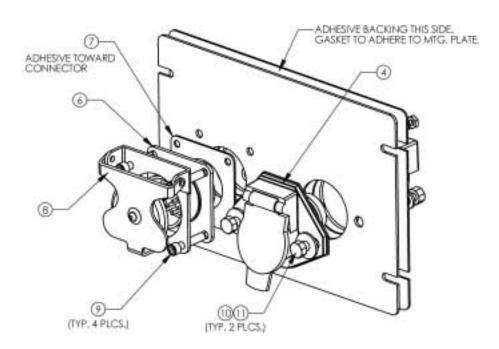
0N10-1037-00 Module Face Plate Sub-Assembly, Back side
